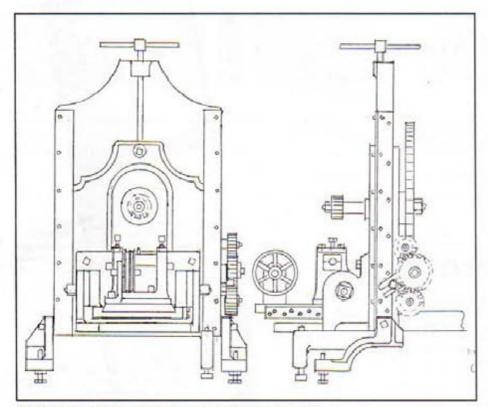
Sketch of Richard Robert's gear cutting machine, 1821.
